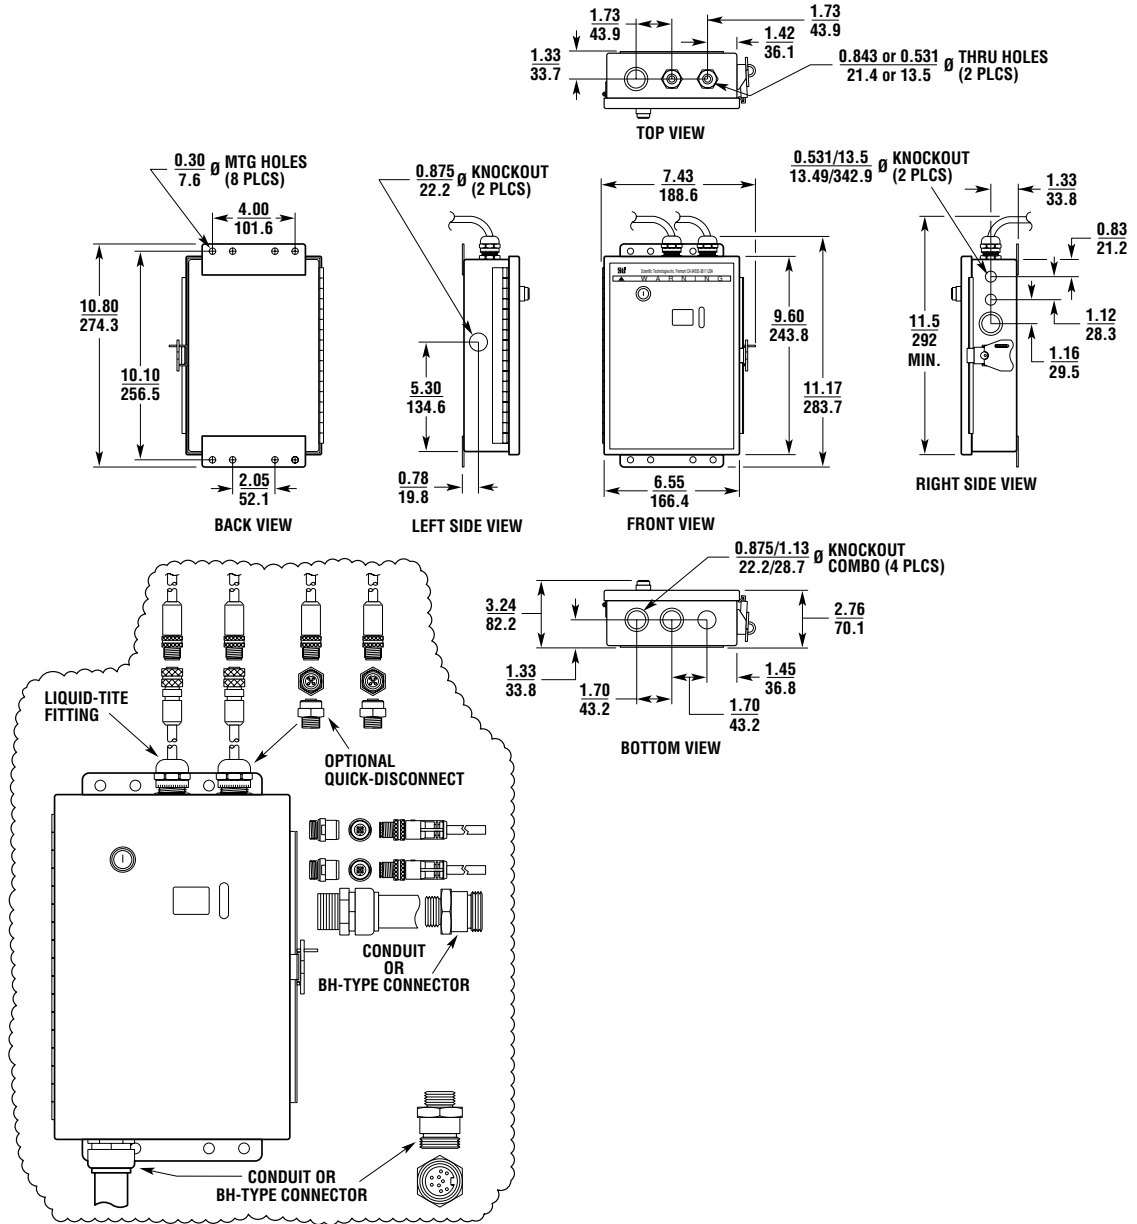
LCM Nema Metal Chassis Controller Dimension Drawing
